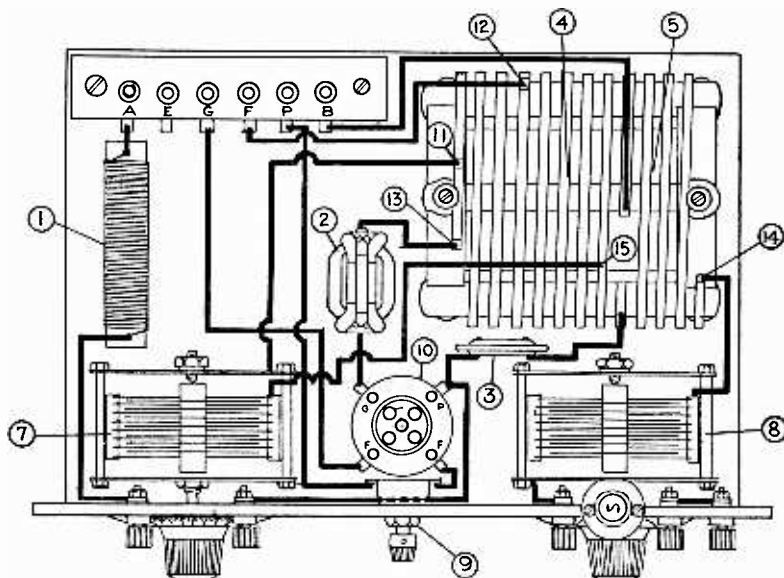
Layout of Apparatus for Short Wave Transmitter.
